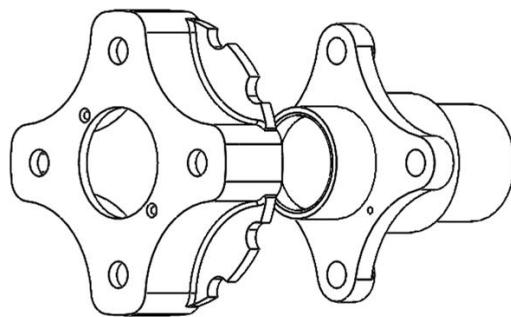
Wheel hub - new - 5 x threaded bolt pattern
